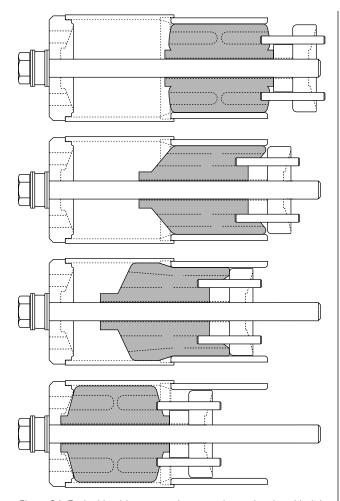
Typical bushing removal progression as hex head bolt is turned clockwise
